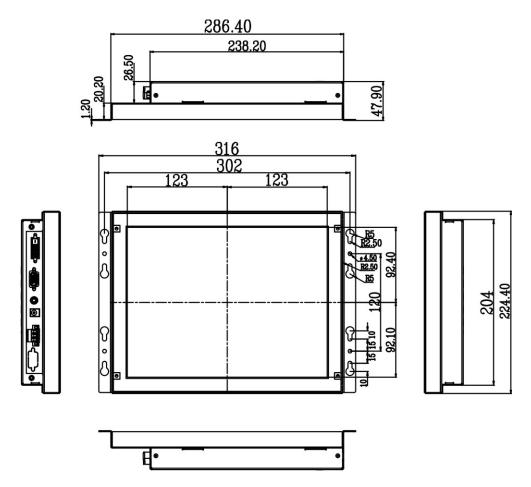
SRM-KIT121 Physical Dimensions (millimeters)
